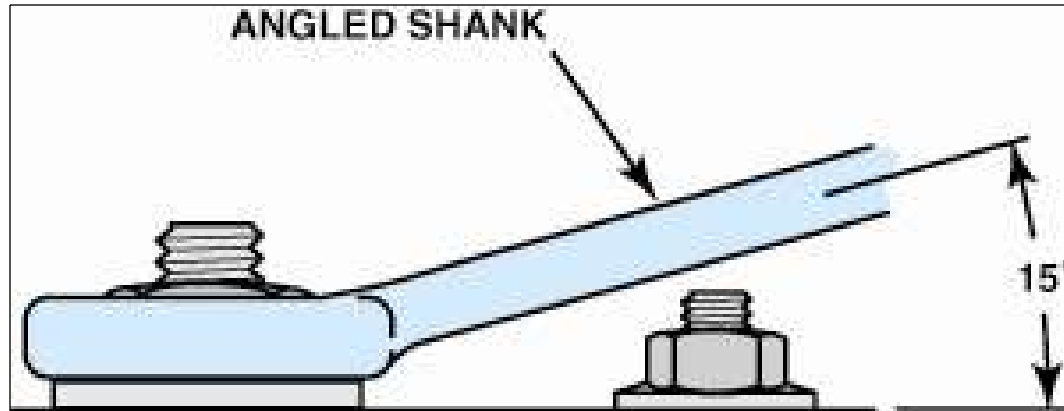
A typical box-end wrench is able to grip the bolt or nut at points completely around the fastener. Each end is a different size.
